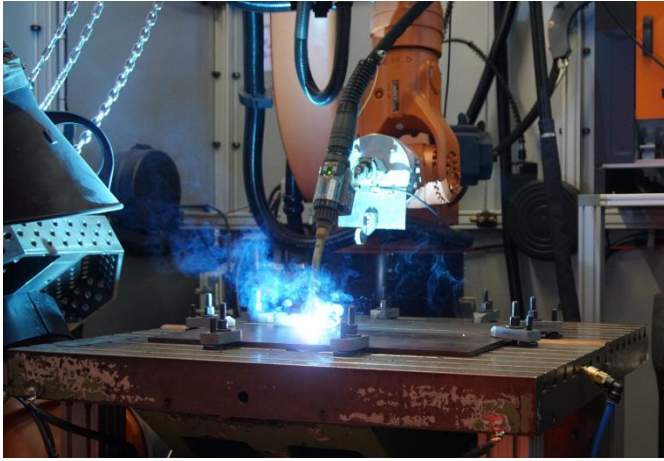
Welding of samples using a 6-axis robot handling system (Kuka KR60HA)
